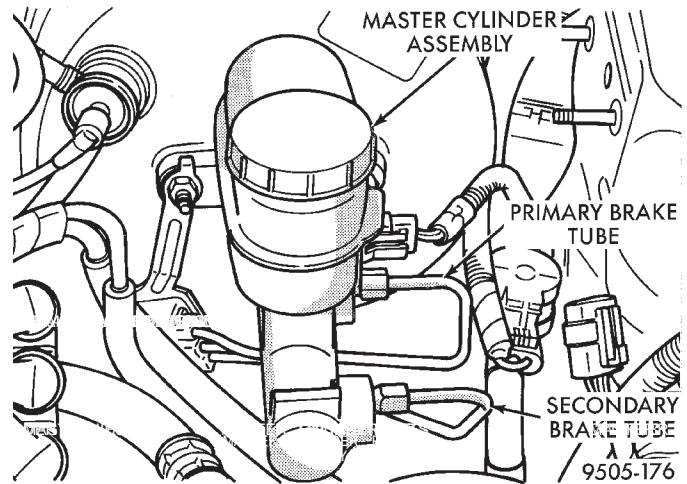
Primary And Secondary Brake Tubes With Antilock Brakes
